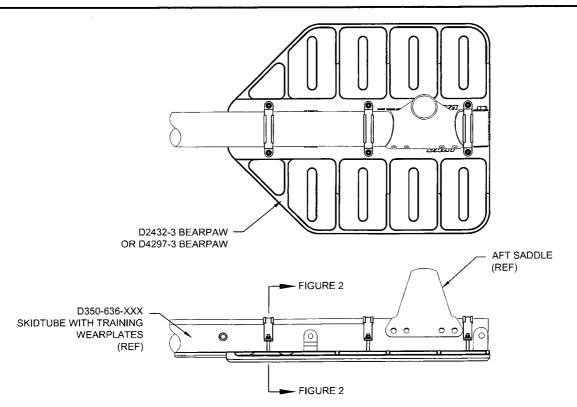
Bearpaw Location (D350-578-015 Kit Shown, -017 Similar)
